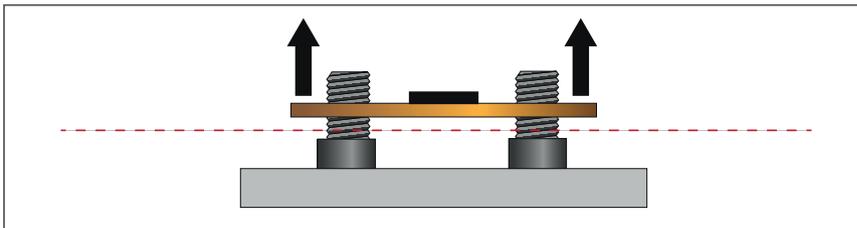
HV BM 1.2, remove the shunt module from the threaded bolts
